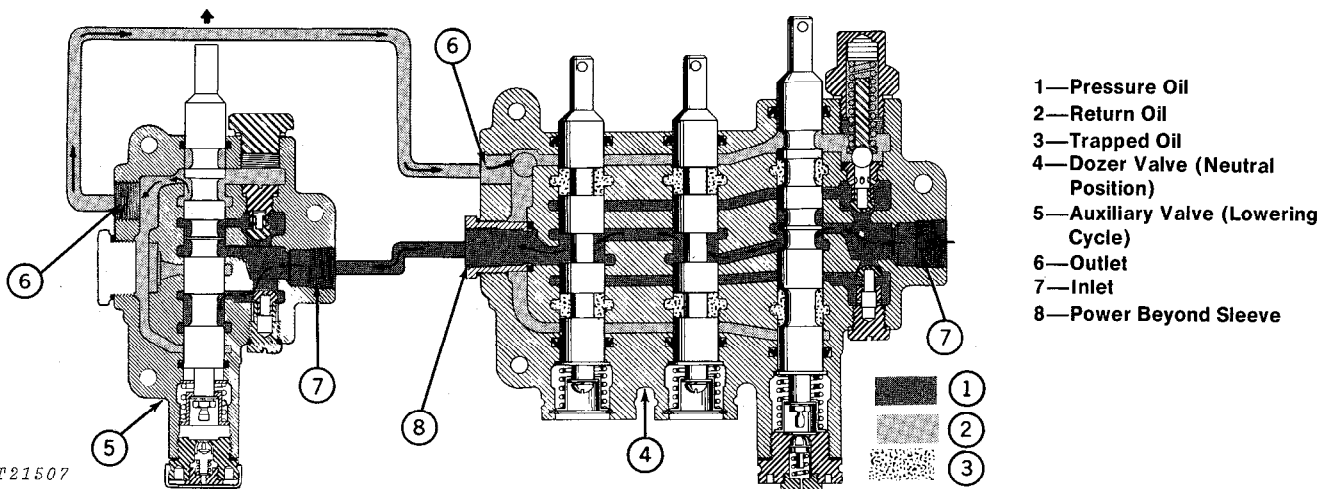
Three-Spool Control Valve with Auxiliary Valve
